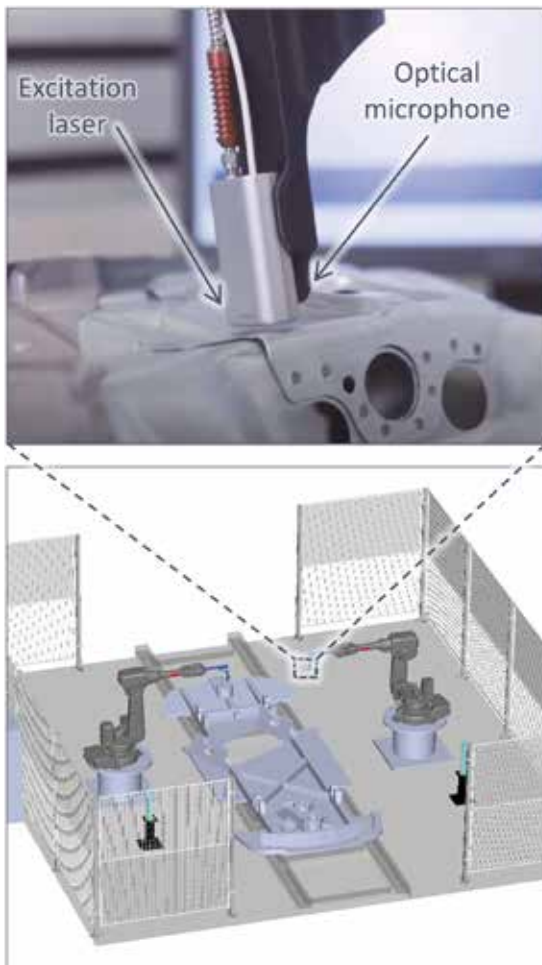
Fully automated LEA cell for spot-weld inspection with two industrial robots performing the testing. No physical contact between steel and sensor head is required.
